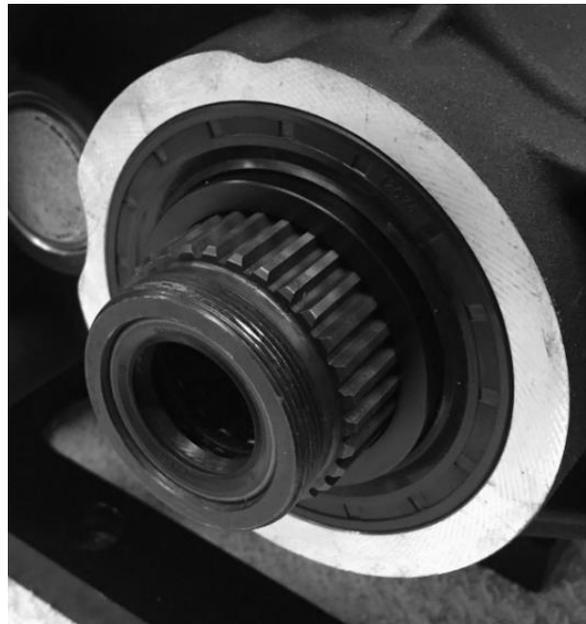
| MAIN DRIVE GEAR SEAL INSTALLED FLUSH WITH CASE
